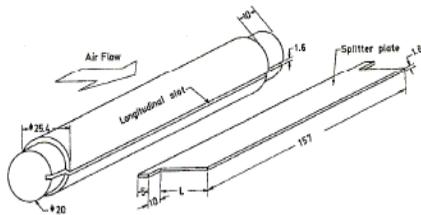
Base cylinder with longitudinal slot for splitter plate assembly
